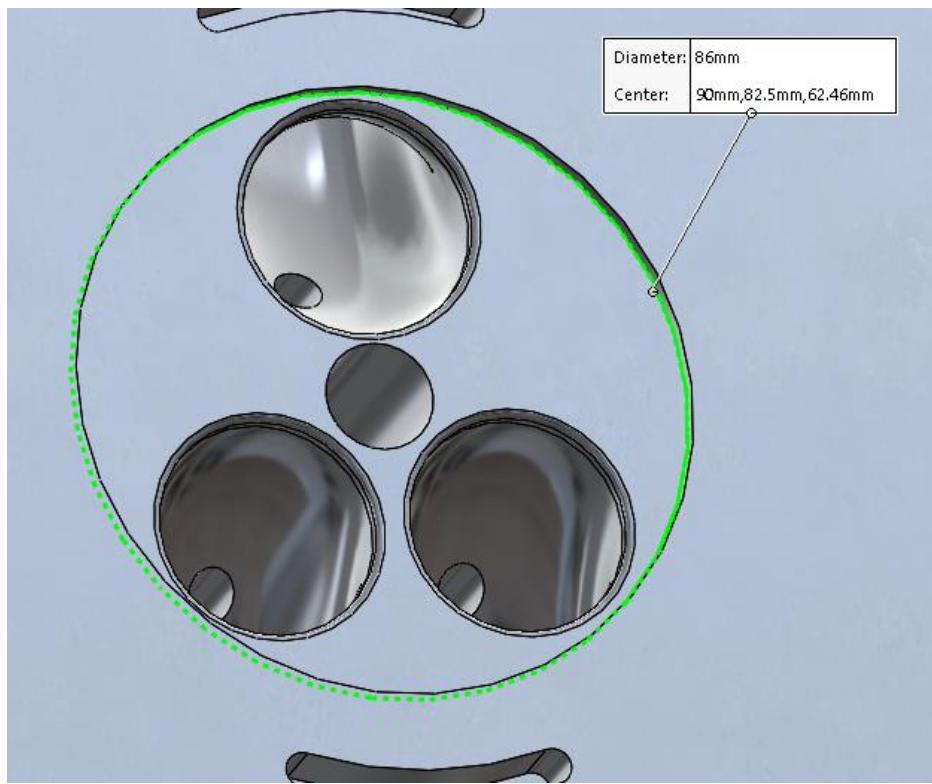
CAD and dimension of the piston designed and to be optimized in 2024 year.
